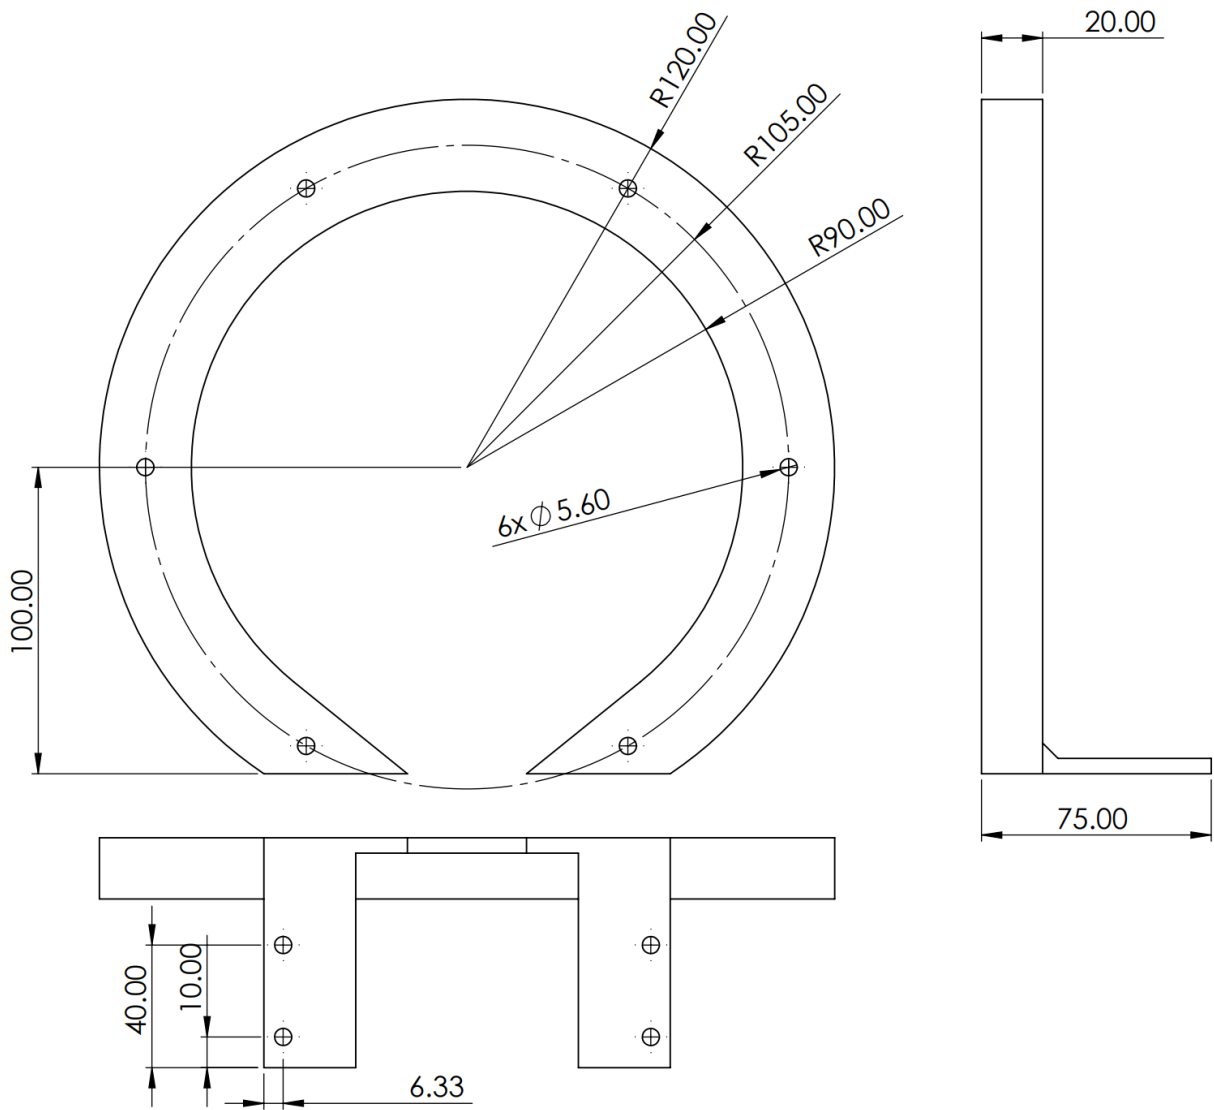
Technical Representation of the Chaser ALN Mount.
